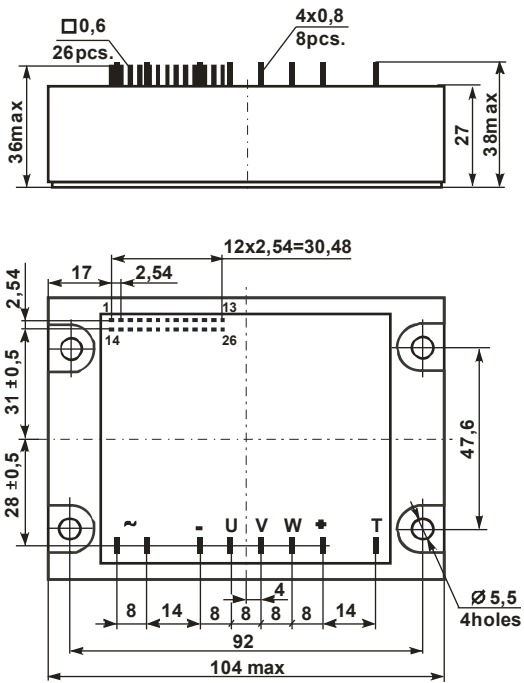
Overall dimensions 1-5,10-1,2,6-A1
